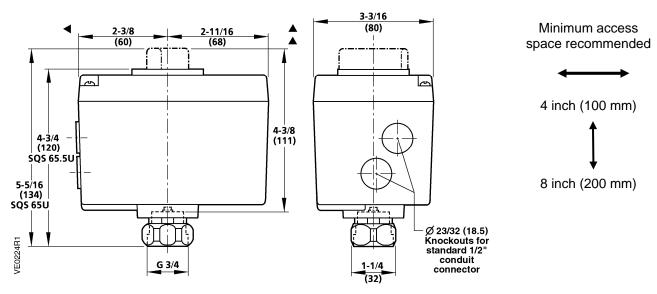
SQS65U Dimensions in Inches (Millimeters).
